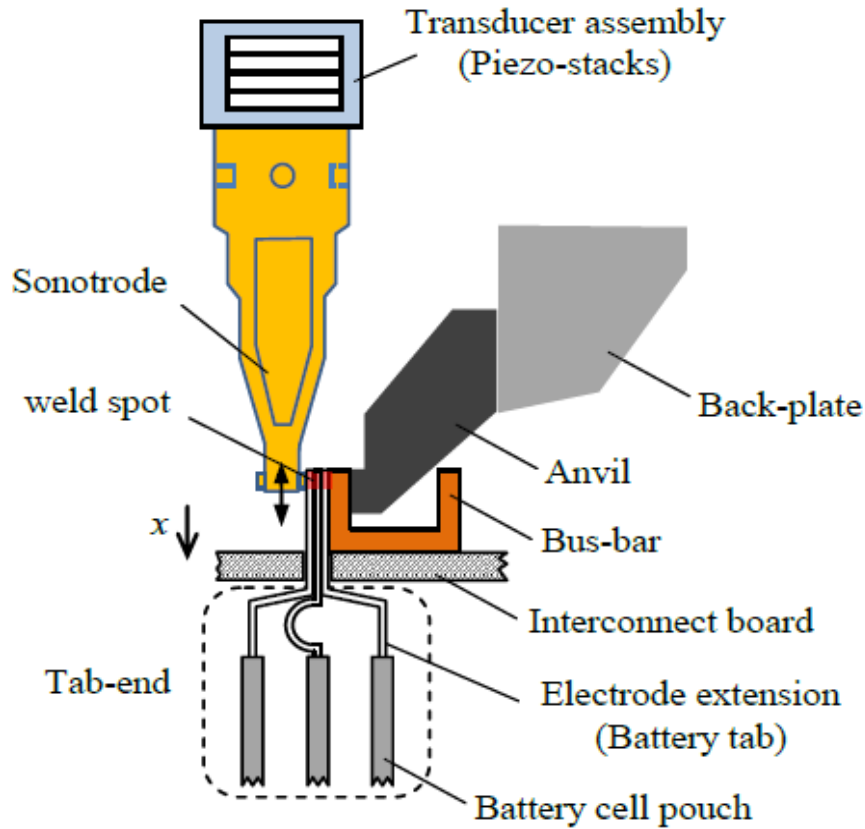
WELD PROPAGATION IN ULTRASONIC METAL WELDING OF MULTIPLE SHEETS
